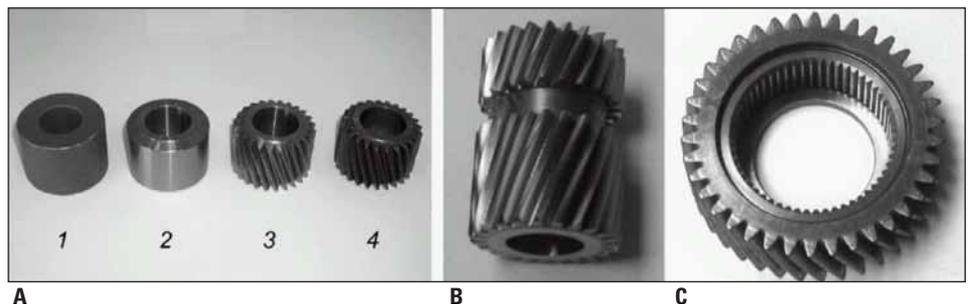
Machining steps of a planetary gear: 1) forging; 2) turned blank; 3) soft-hobbed gear; 4) hardened and finished gear (Ref. 4).
